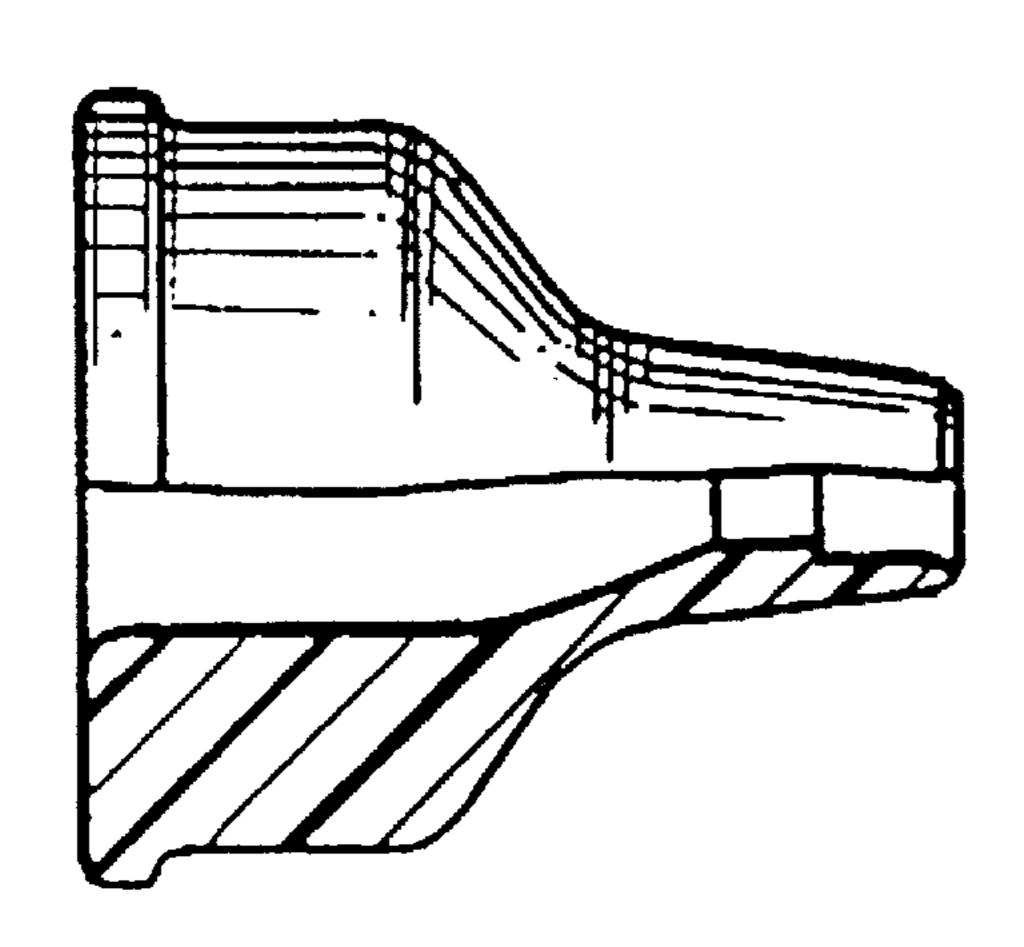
is a front view of the gun nozzle depicted in FIG. 12; and,
